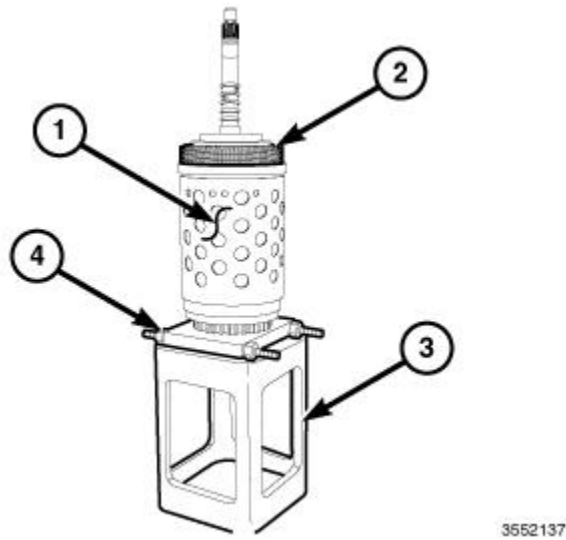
P4 Annulus Drum Assembly, Press Fixture Assembly & Bearing/Gear Splitter
